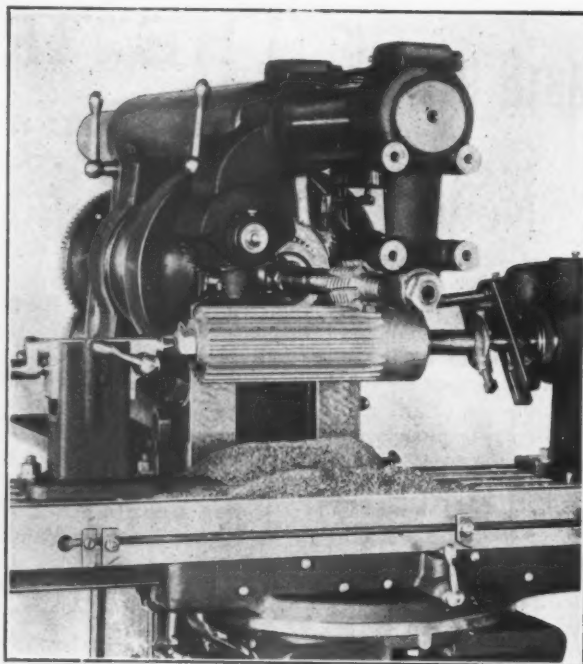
Hobbing a Long Spur Pinion with the Attachment.
